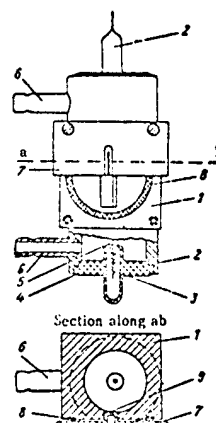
Construction of Geiger counter. 1—casing (copper); 2—glass insulator; 3—spring; 4—picein; 5—tungsten wire (diameter 0.05 mm); 6—hose connections for filling; 7—frame; 8—rubber gasket; 9—celluloid window.
